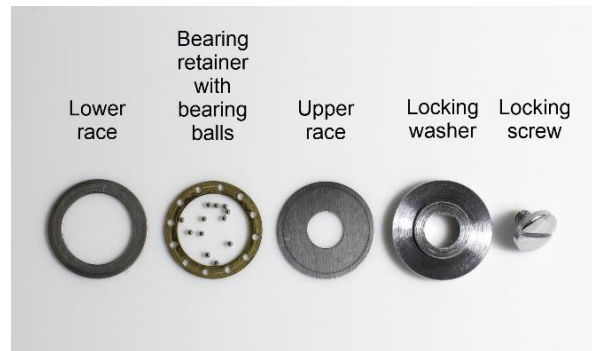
The parts of the inner ball bearing after removal and disassembly.
